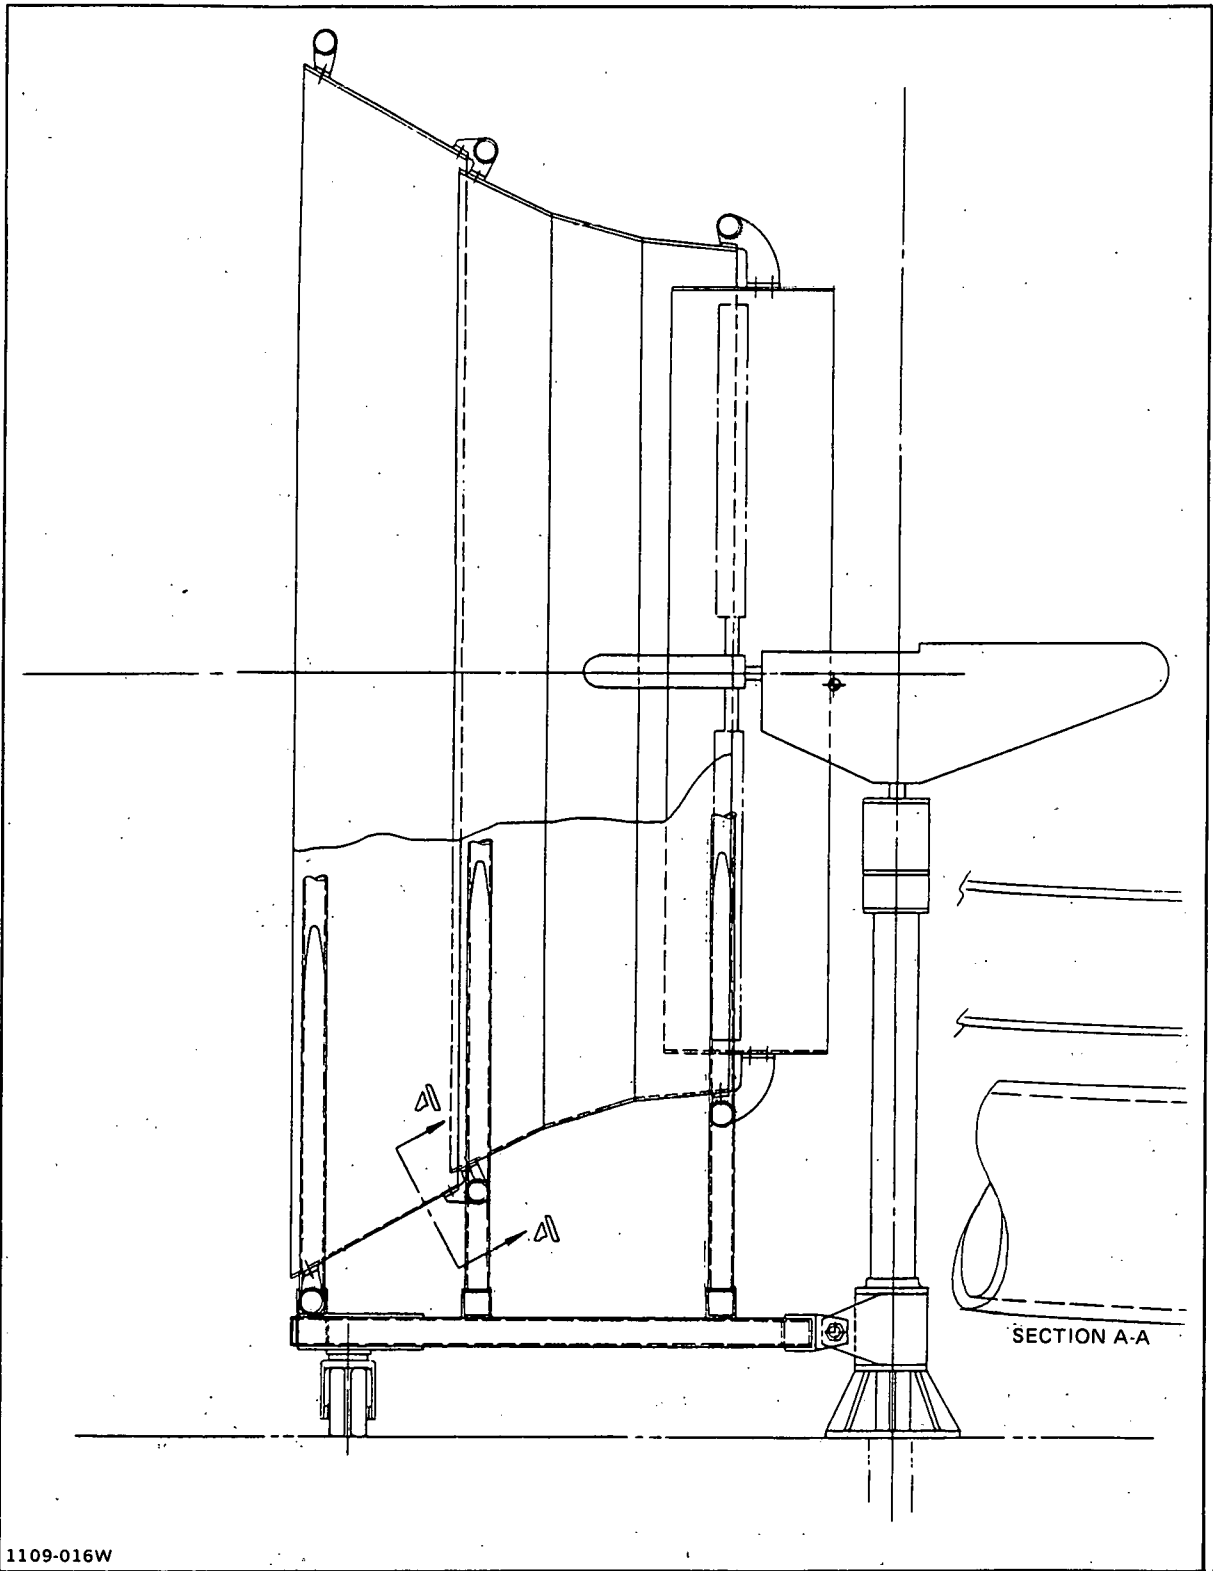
Alternate No. 2. Flat Thin Rolled Sheet, External Stiffeners, Welded Assembly
